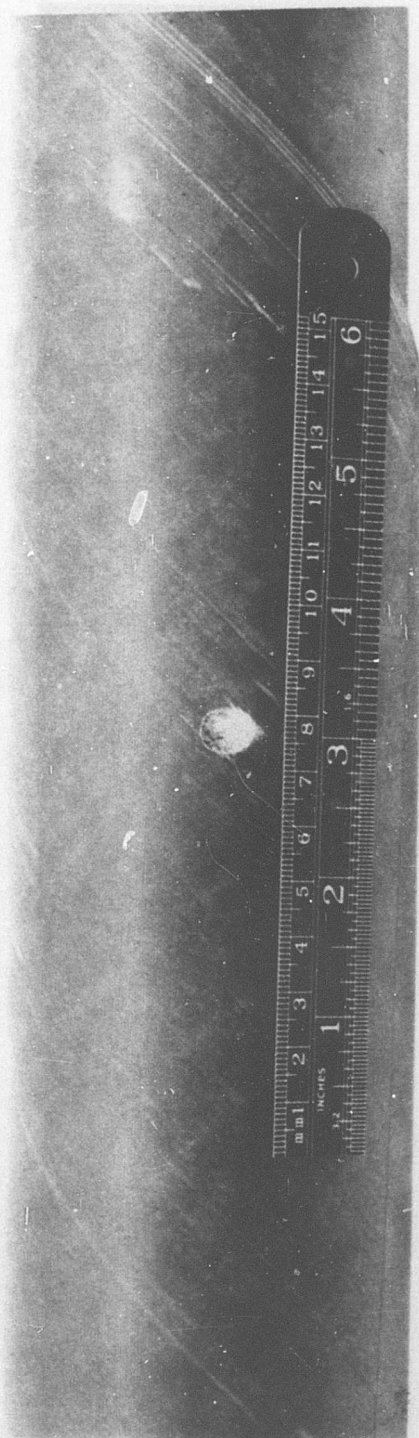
Boron/Epoxy Specimen 7, $L = 45.9$ inches, Entrance Hole Damage.
